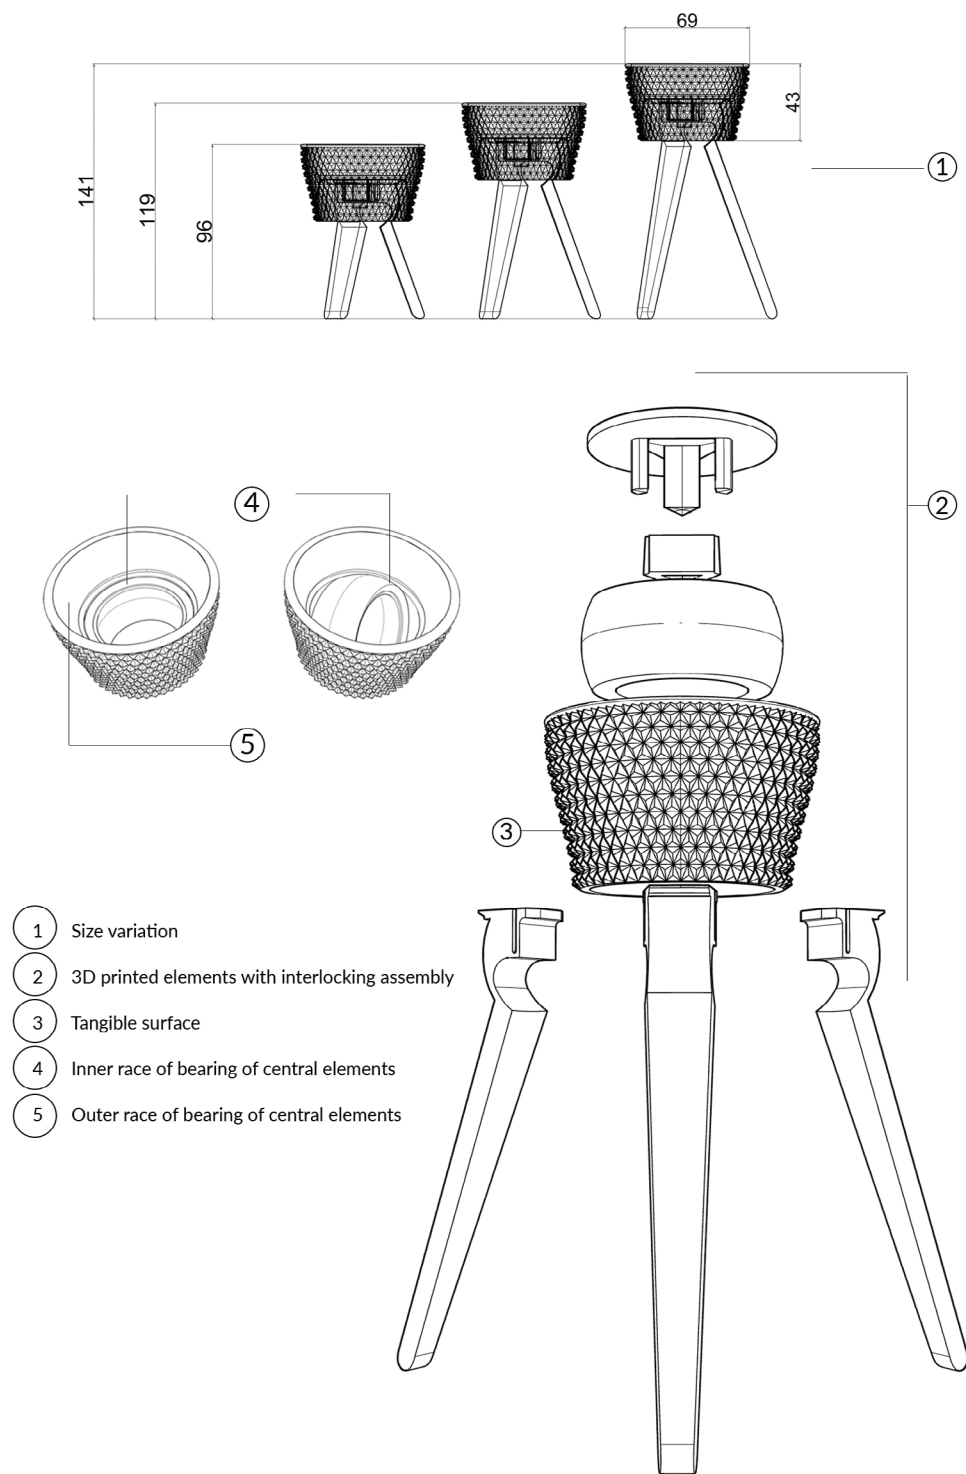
Exploded view and assembly with the centre element with tangible outside surface and bearing feature with the necessary gap to be able to move but printed as one piece.
